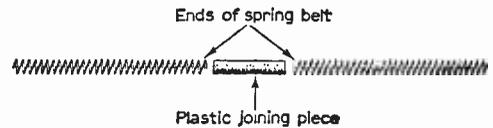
Spring belts used on some machines are joined by a plastic insert.
